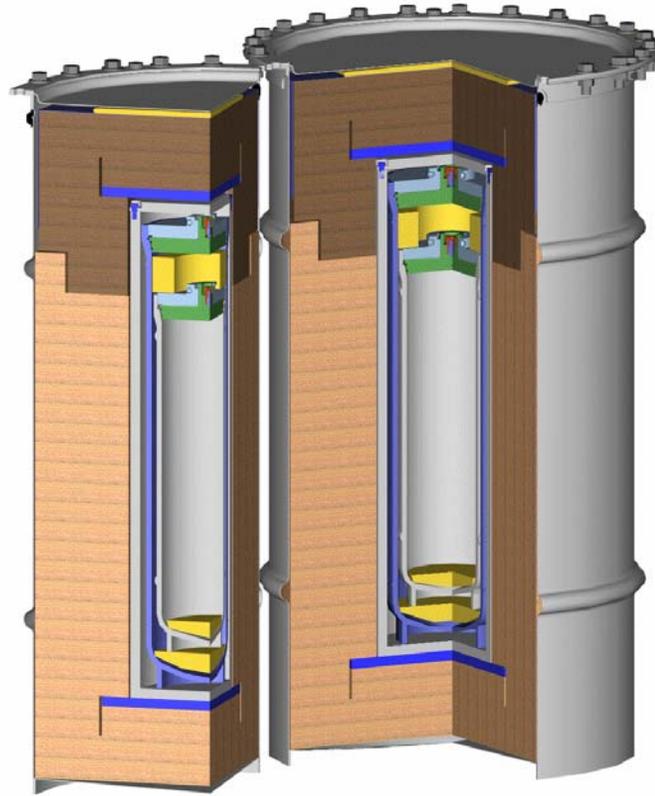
Illustration of 9975 package including fiberboard, lead shielding, and double containment vessels sealed with dual O-rings.
